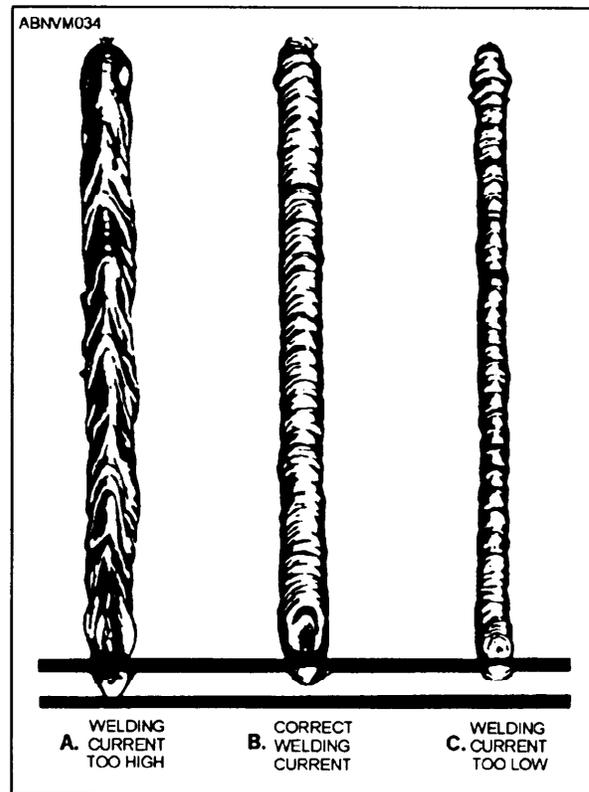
Comparative GTA weld beads as determined by electrical current.
